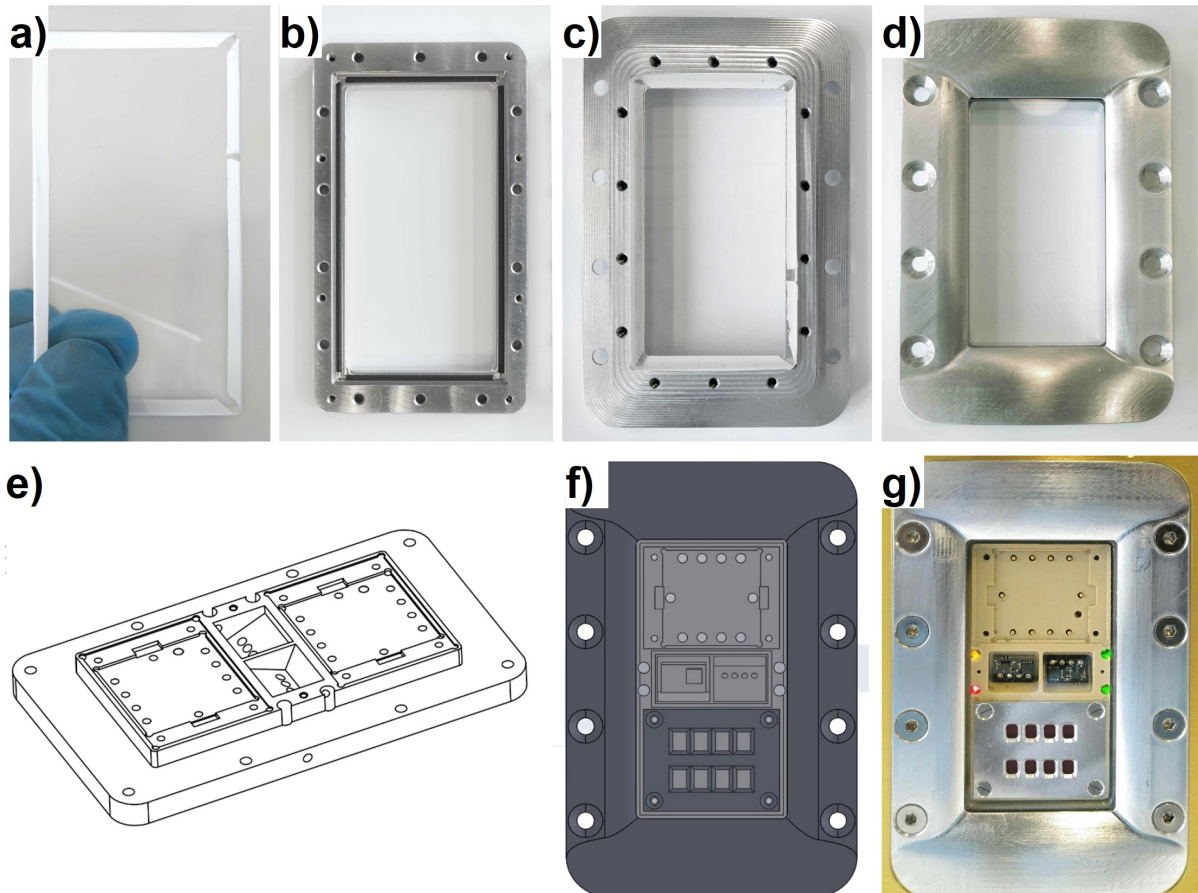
Assembly of a hatch insertion module. a) Fused silica wrapped with a PTFE band, b) outer frame with glass and c) inner frame with rubber stripes inserted, d) ready assembled framework, with a discernible bent surface of the outer frame. e) Excerpt of the construction plans of the PEEK solar cell holder. The solar cells are installed in the elevated socket, protruding into the inner frame to place the SCs as close as possible to the glass. f) CAD of a single hatch insertion module. g) Photograph of the assembled insertion module. Inspired by Benjamin Predeschly's Master thesis [190]. For a detailed description of the parts, see the text in the next section.
